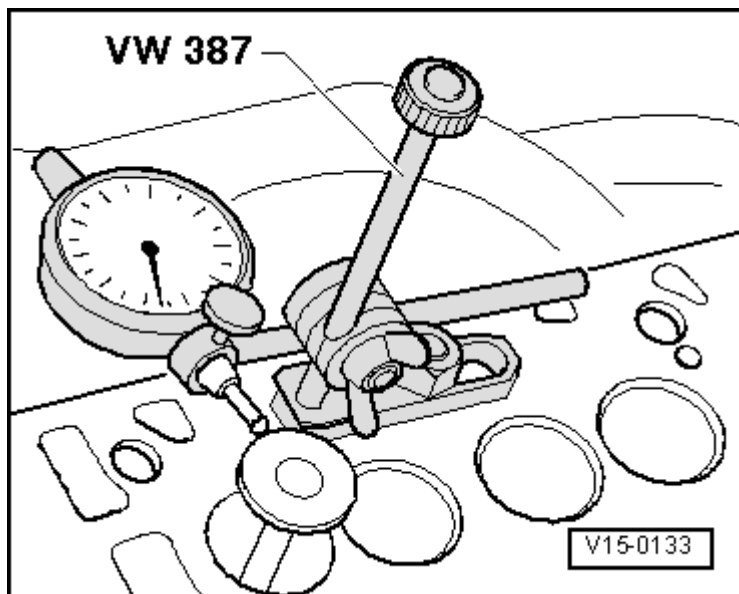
Identifying Dial Gauge Holder VW 387 And Dial Gauge VAS 6079 To Determine Valve Rock (Wear Limit)
